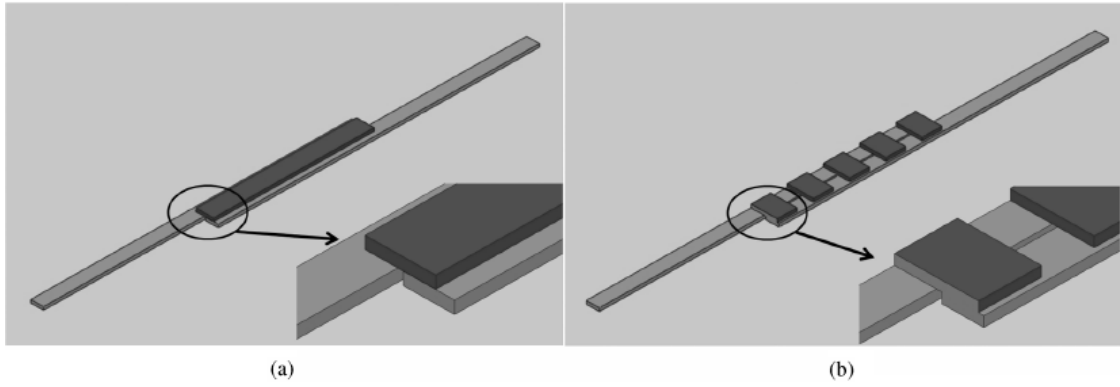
(a) Parallel joint (b) Perpendicular joint. [42]
